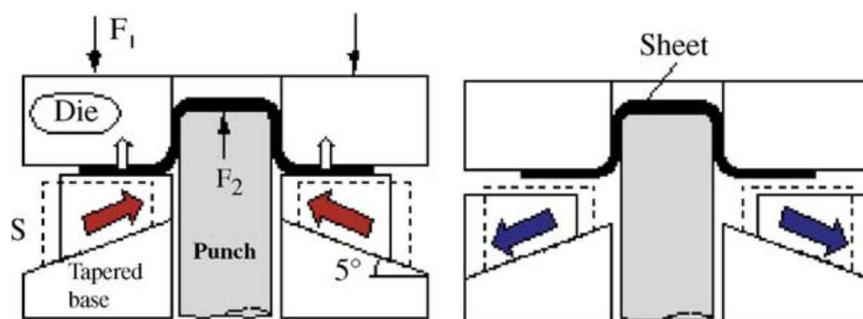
Deep drawing using tapered blank holder divided into for segments [6]
